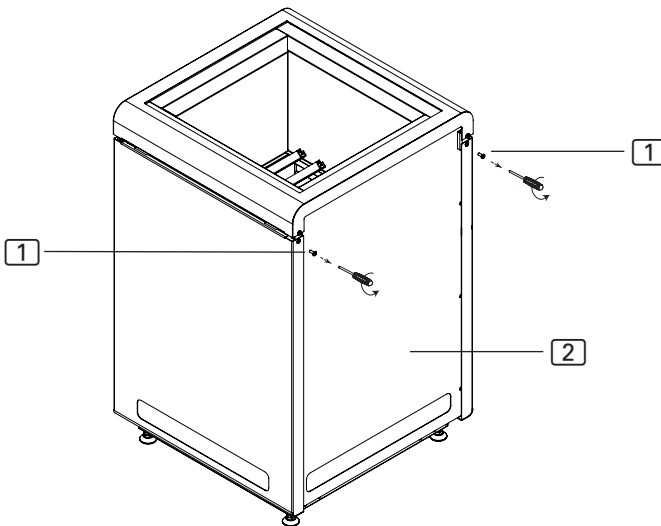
Attaching the mounting rail to the Concept R sauna heater
